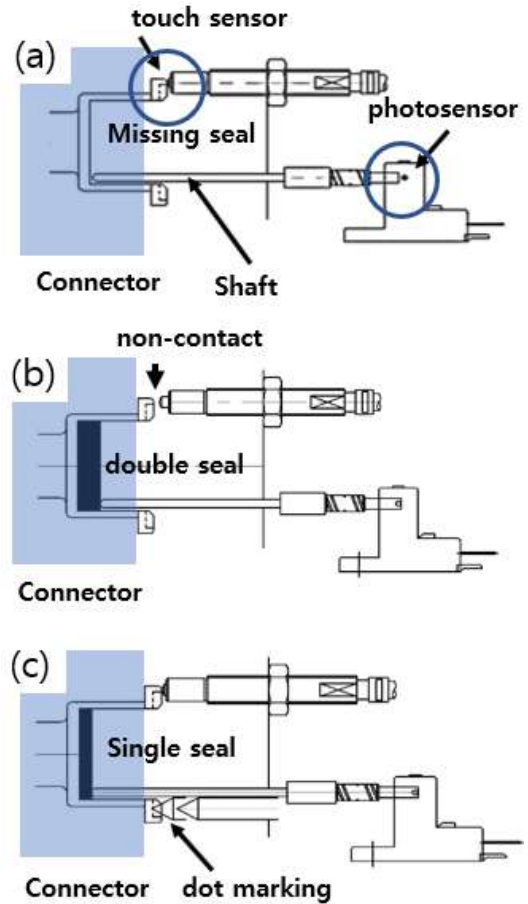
Design drawings of inspection equipment. (a) The product with missing seal is inserted into the inspection equipment. (b) The product with a double seal is inserted into the inspection equipment. (c) The normal product is inserted into the inspection equipment.
